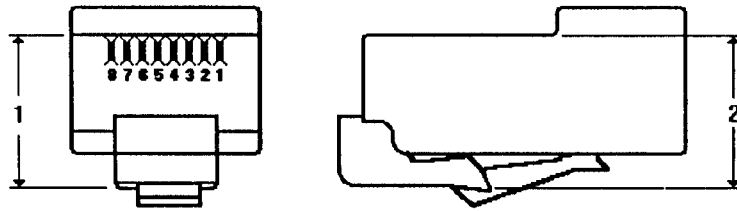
(c)(2)(ii) Unkeyed Plug - 8 Position Back View
